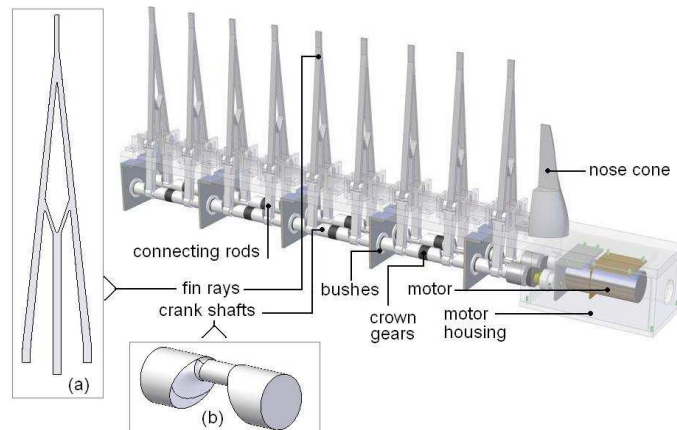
CAD drawing showing the principal elements of the WaveDrive, insert (a) shows the design of the fin ray and insert (b) shows a crank shaft section
